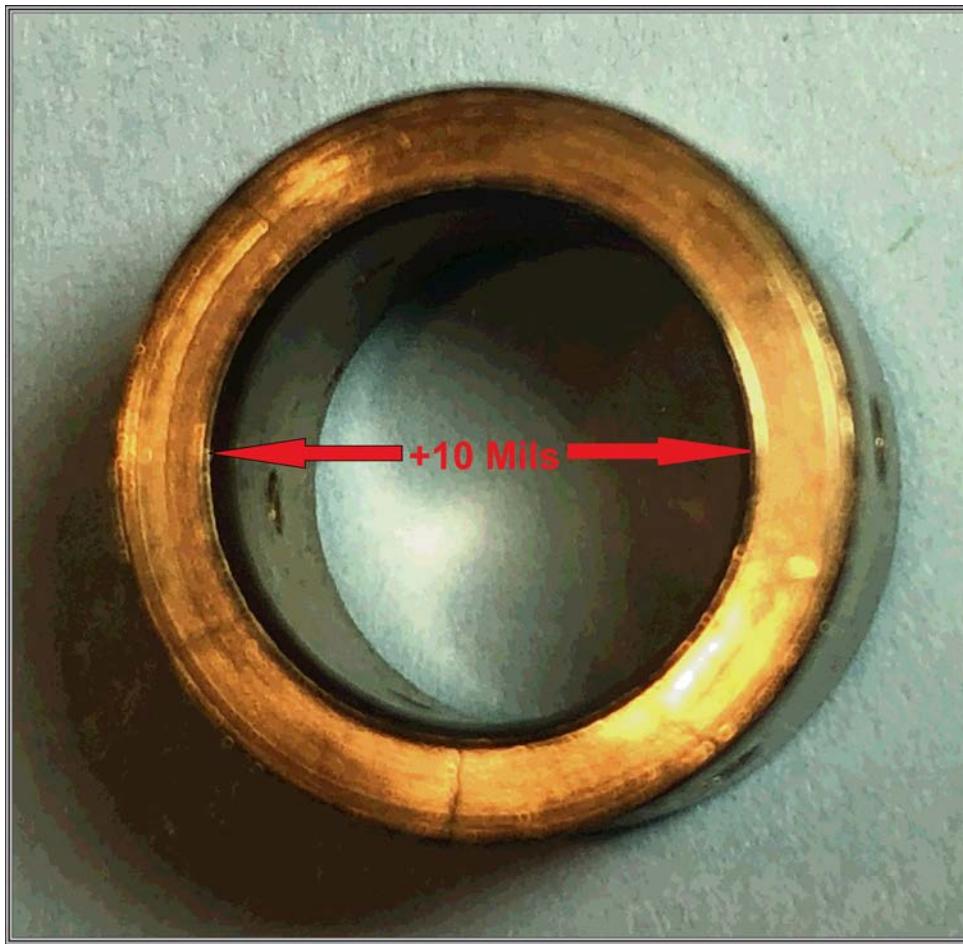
Compressor Bushing Showing Enlarged Bearing by 10 Mils
